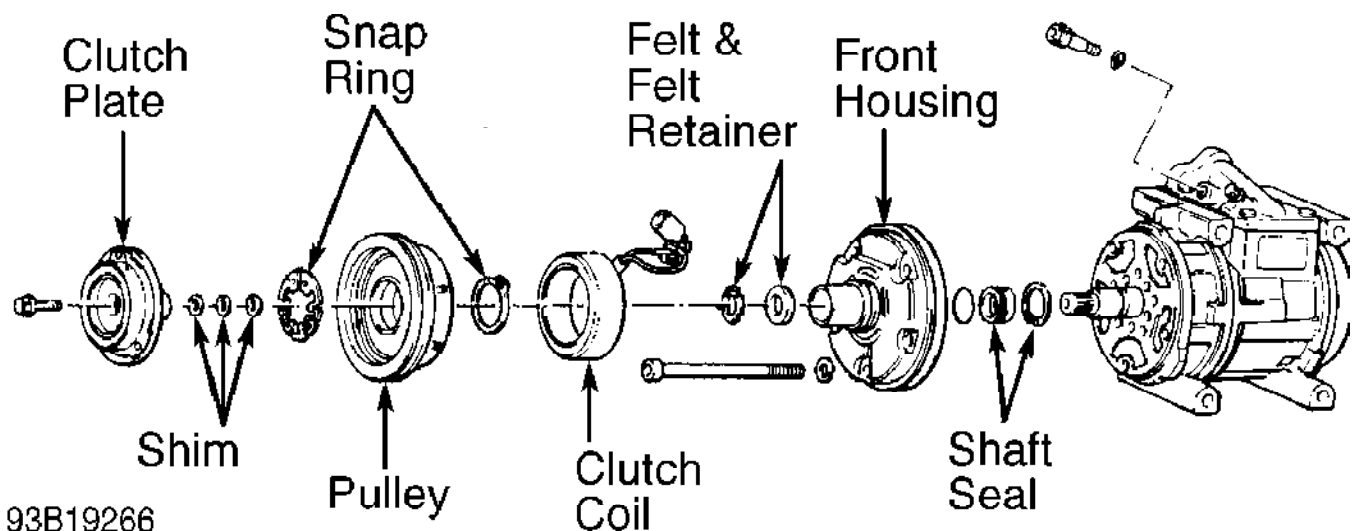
Exploded View Of Compressor Clutch (2.0L Non-Turbo)
